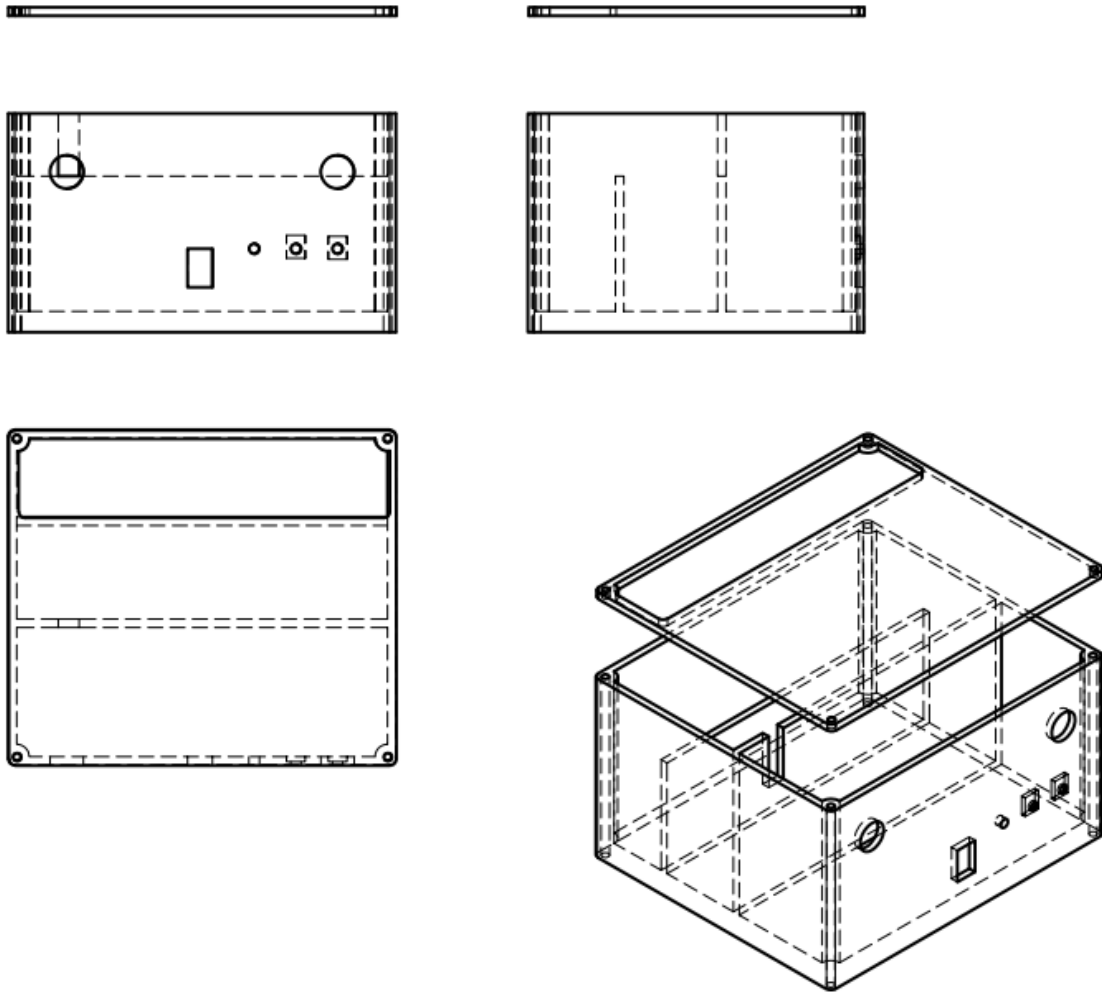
Fusion 360 generated technical drawing of the designed enclosure
